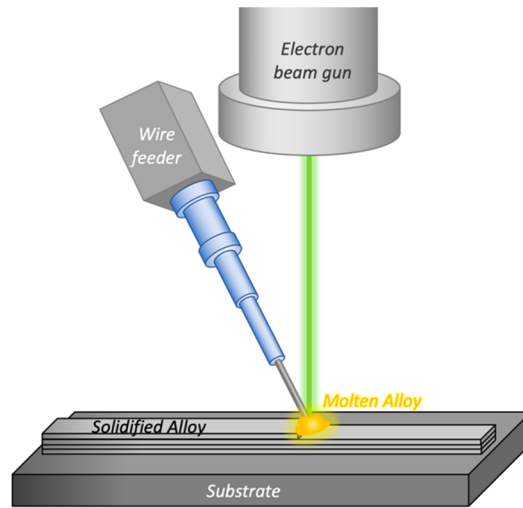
Schematic of Electron Beam Welding (EBW) process with wire feeder.
